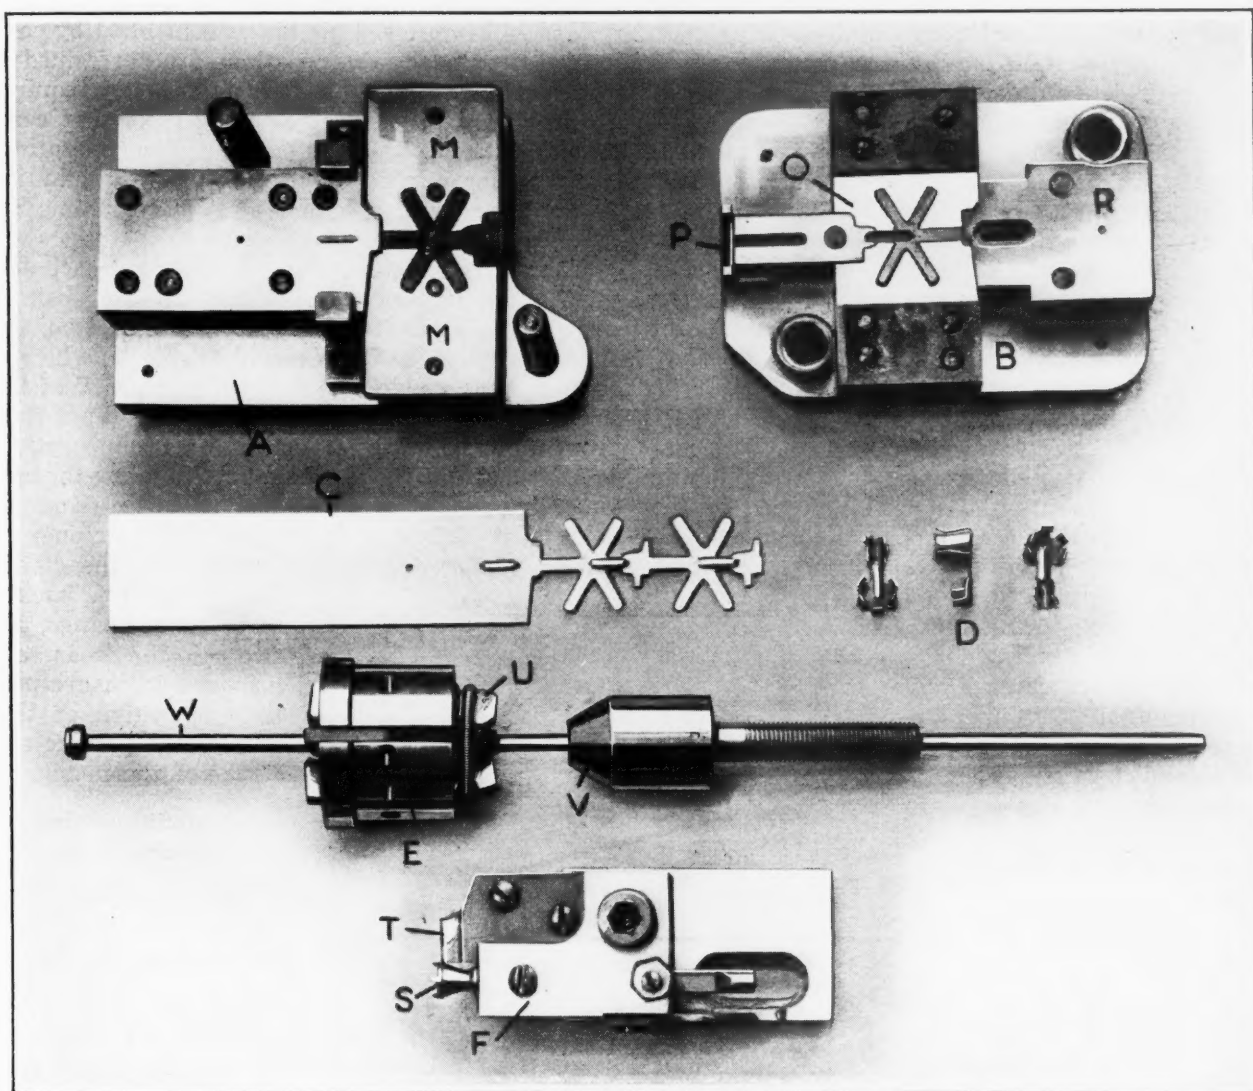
Multi-slide Tool Equipment for Piercing, Embossing, Blanking, and Forming Part D
